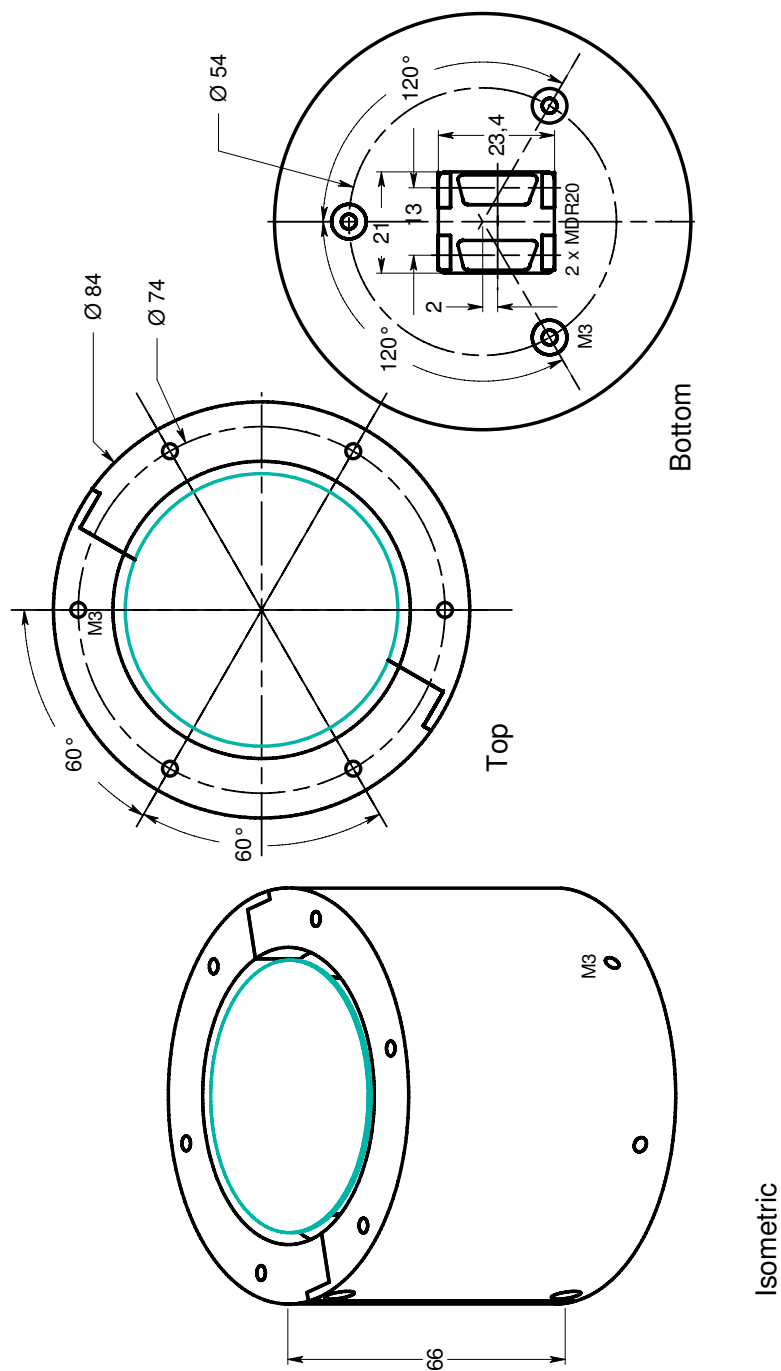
Technical drawing of the package and mounting holes of the 50mm 37-channel PDM
